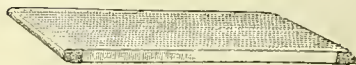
No. 19. SLEEPING-CAR BERTH BOTTOM-SPRING.
